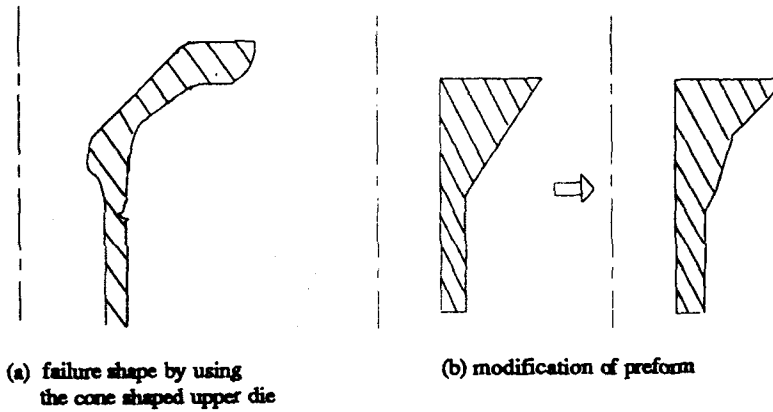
Failure shape by using the cone-shaped upper die and modification of preform for forming to use the incremental forging method for expanding
